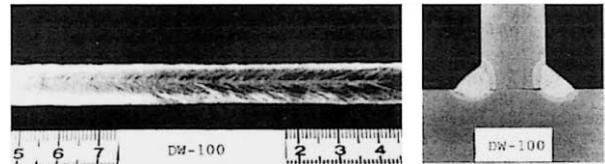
Smooth surface and sufficient penetration of DW-100 weld bead
